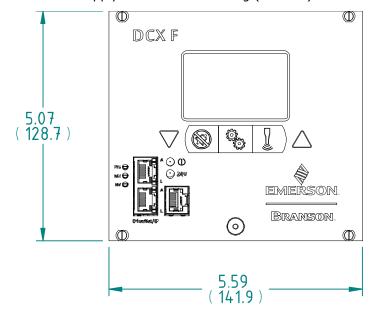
DCX F-EIP Power Supply Dimensional Drawing (Medium)
